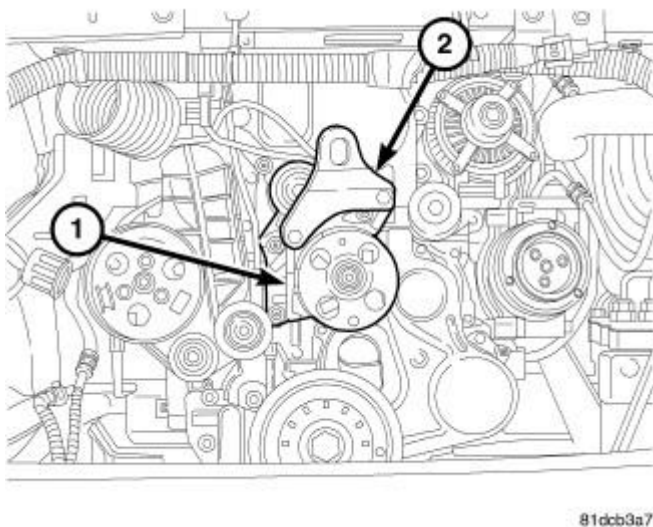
Idler Pulley Assembly & Front Engine Lifting Bracket
